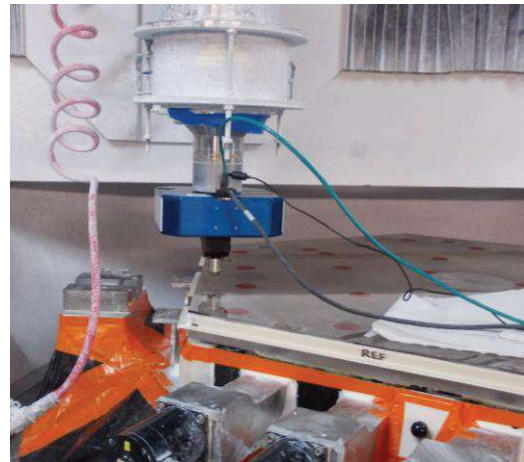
STA fitted to the IRP1600 tool-chuck, testing a full-size segment.
